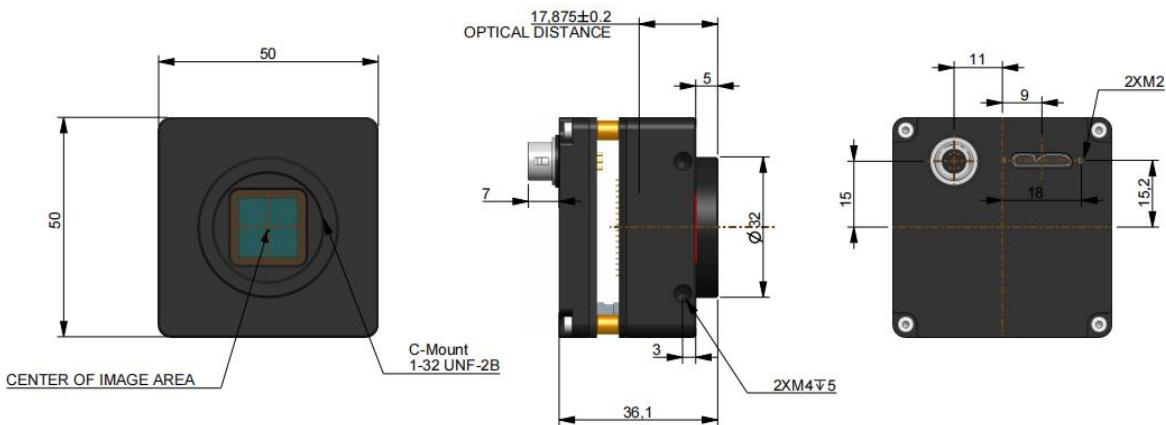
47 Dimensions of OEM3 camera housing (mm)
